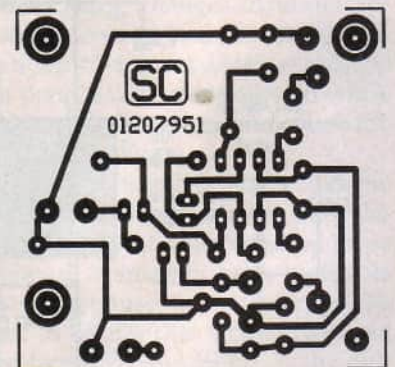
check your board carefully against this full-size pattern before installing any of the parts.
